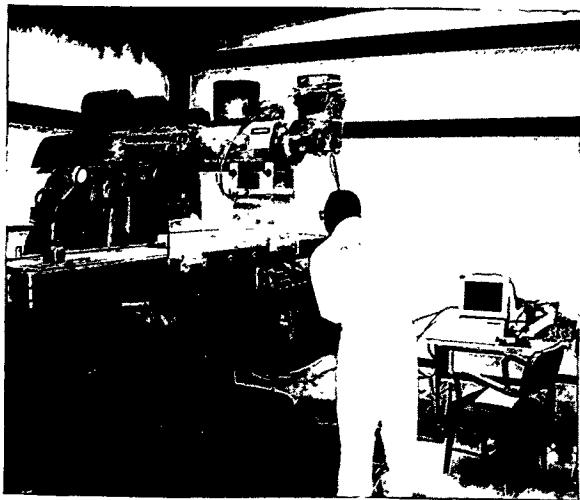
Horizontal milling machine used to perform instrumented, linear, single-cutter tests for Track-Set bit design.
